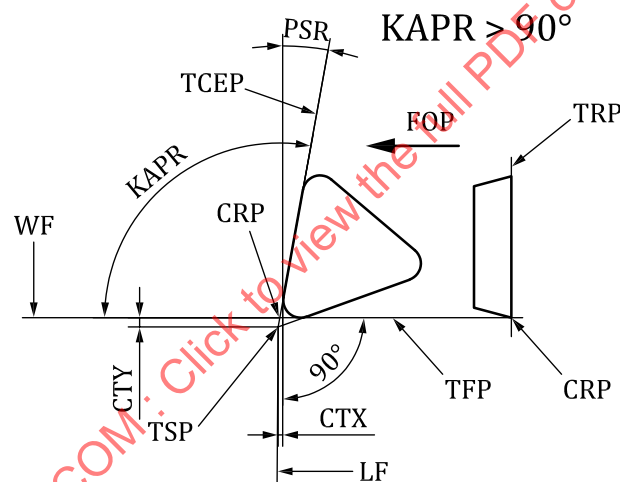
Feed direction parallel to tool axis — $KAPR > 90^\circ$
